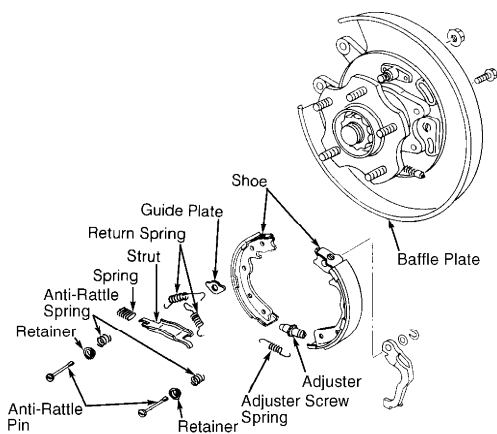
Exploded View of Parking Brake Shoe Assembly (M30)
